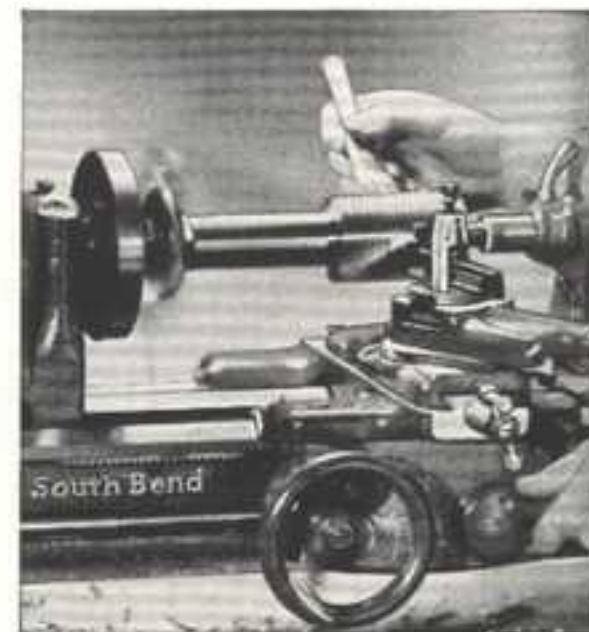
Using a Small Brush to Apply Oil When Cutting Screw Threads
